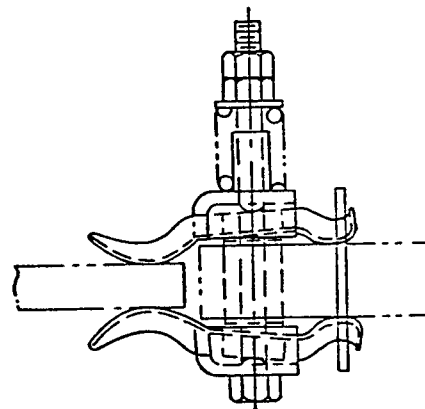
A. Primary disconnect assembly (for AK-50), Ref. No. 220.
